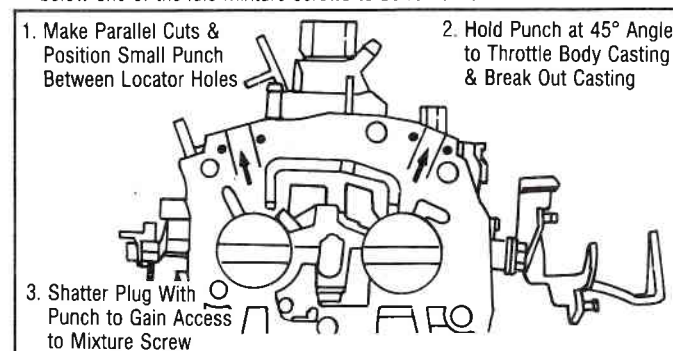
Removing Steel Plugs and Idle Mixture Screws From Throttle Body
